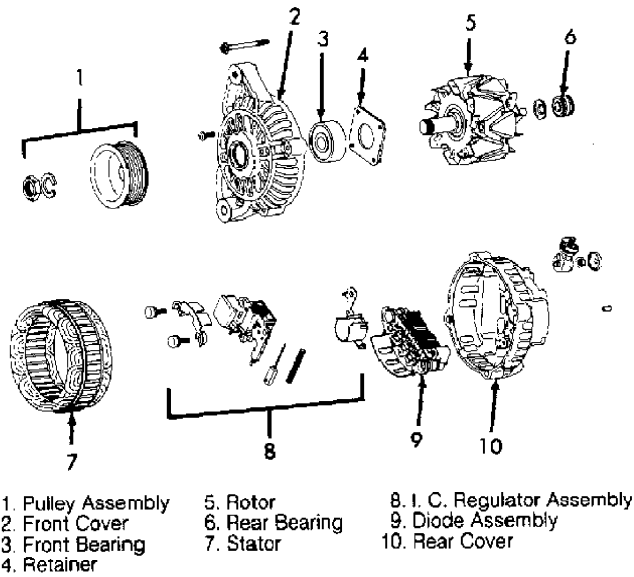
Exploded View Of Alternator (G20 - Mitsubishi)
